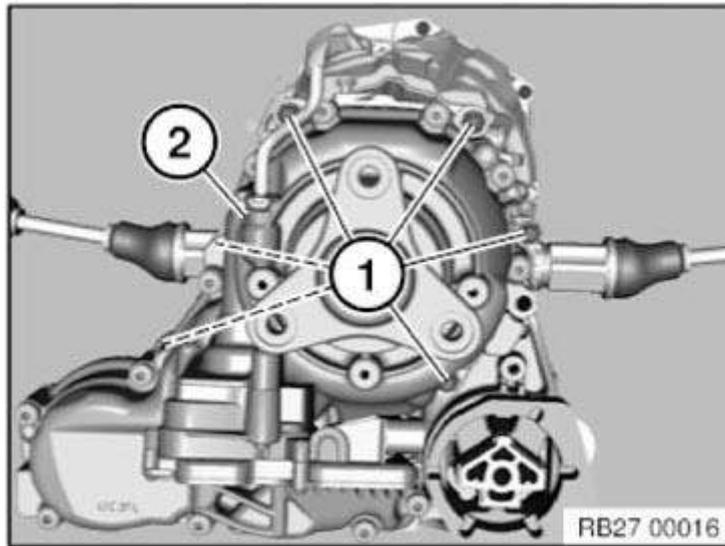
Identifying Transfer Box Screw Connection And Screw
